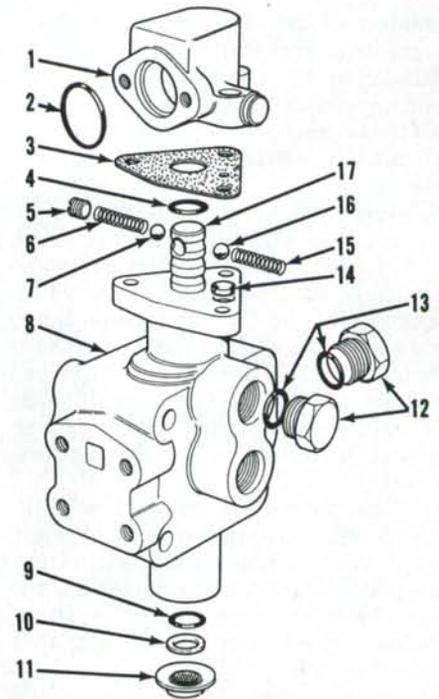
Exploded view of three-way valve showing component parts and their related positions.
